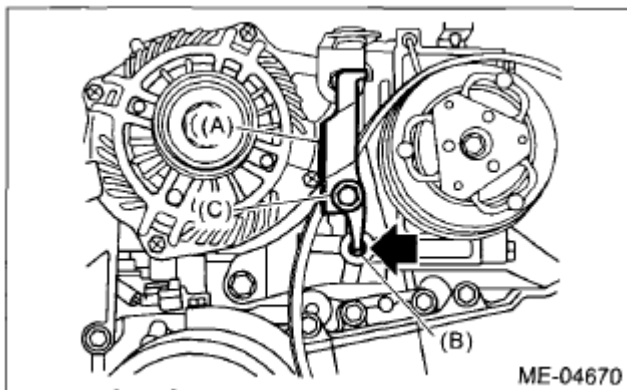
Inserting Claw Of Belt Stopper To Lower Hole Of Compressor Bracket
